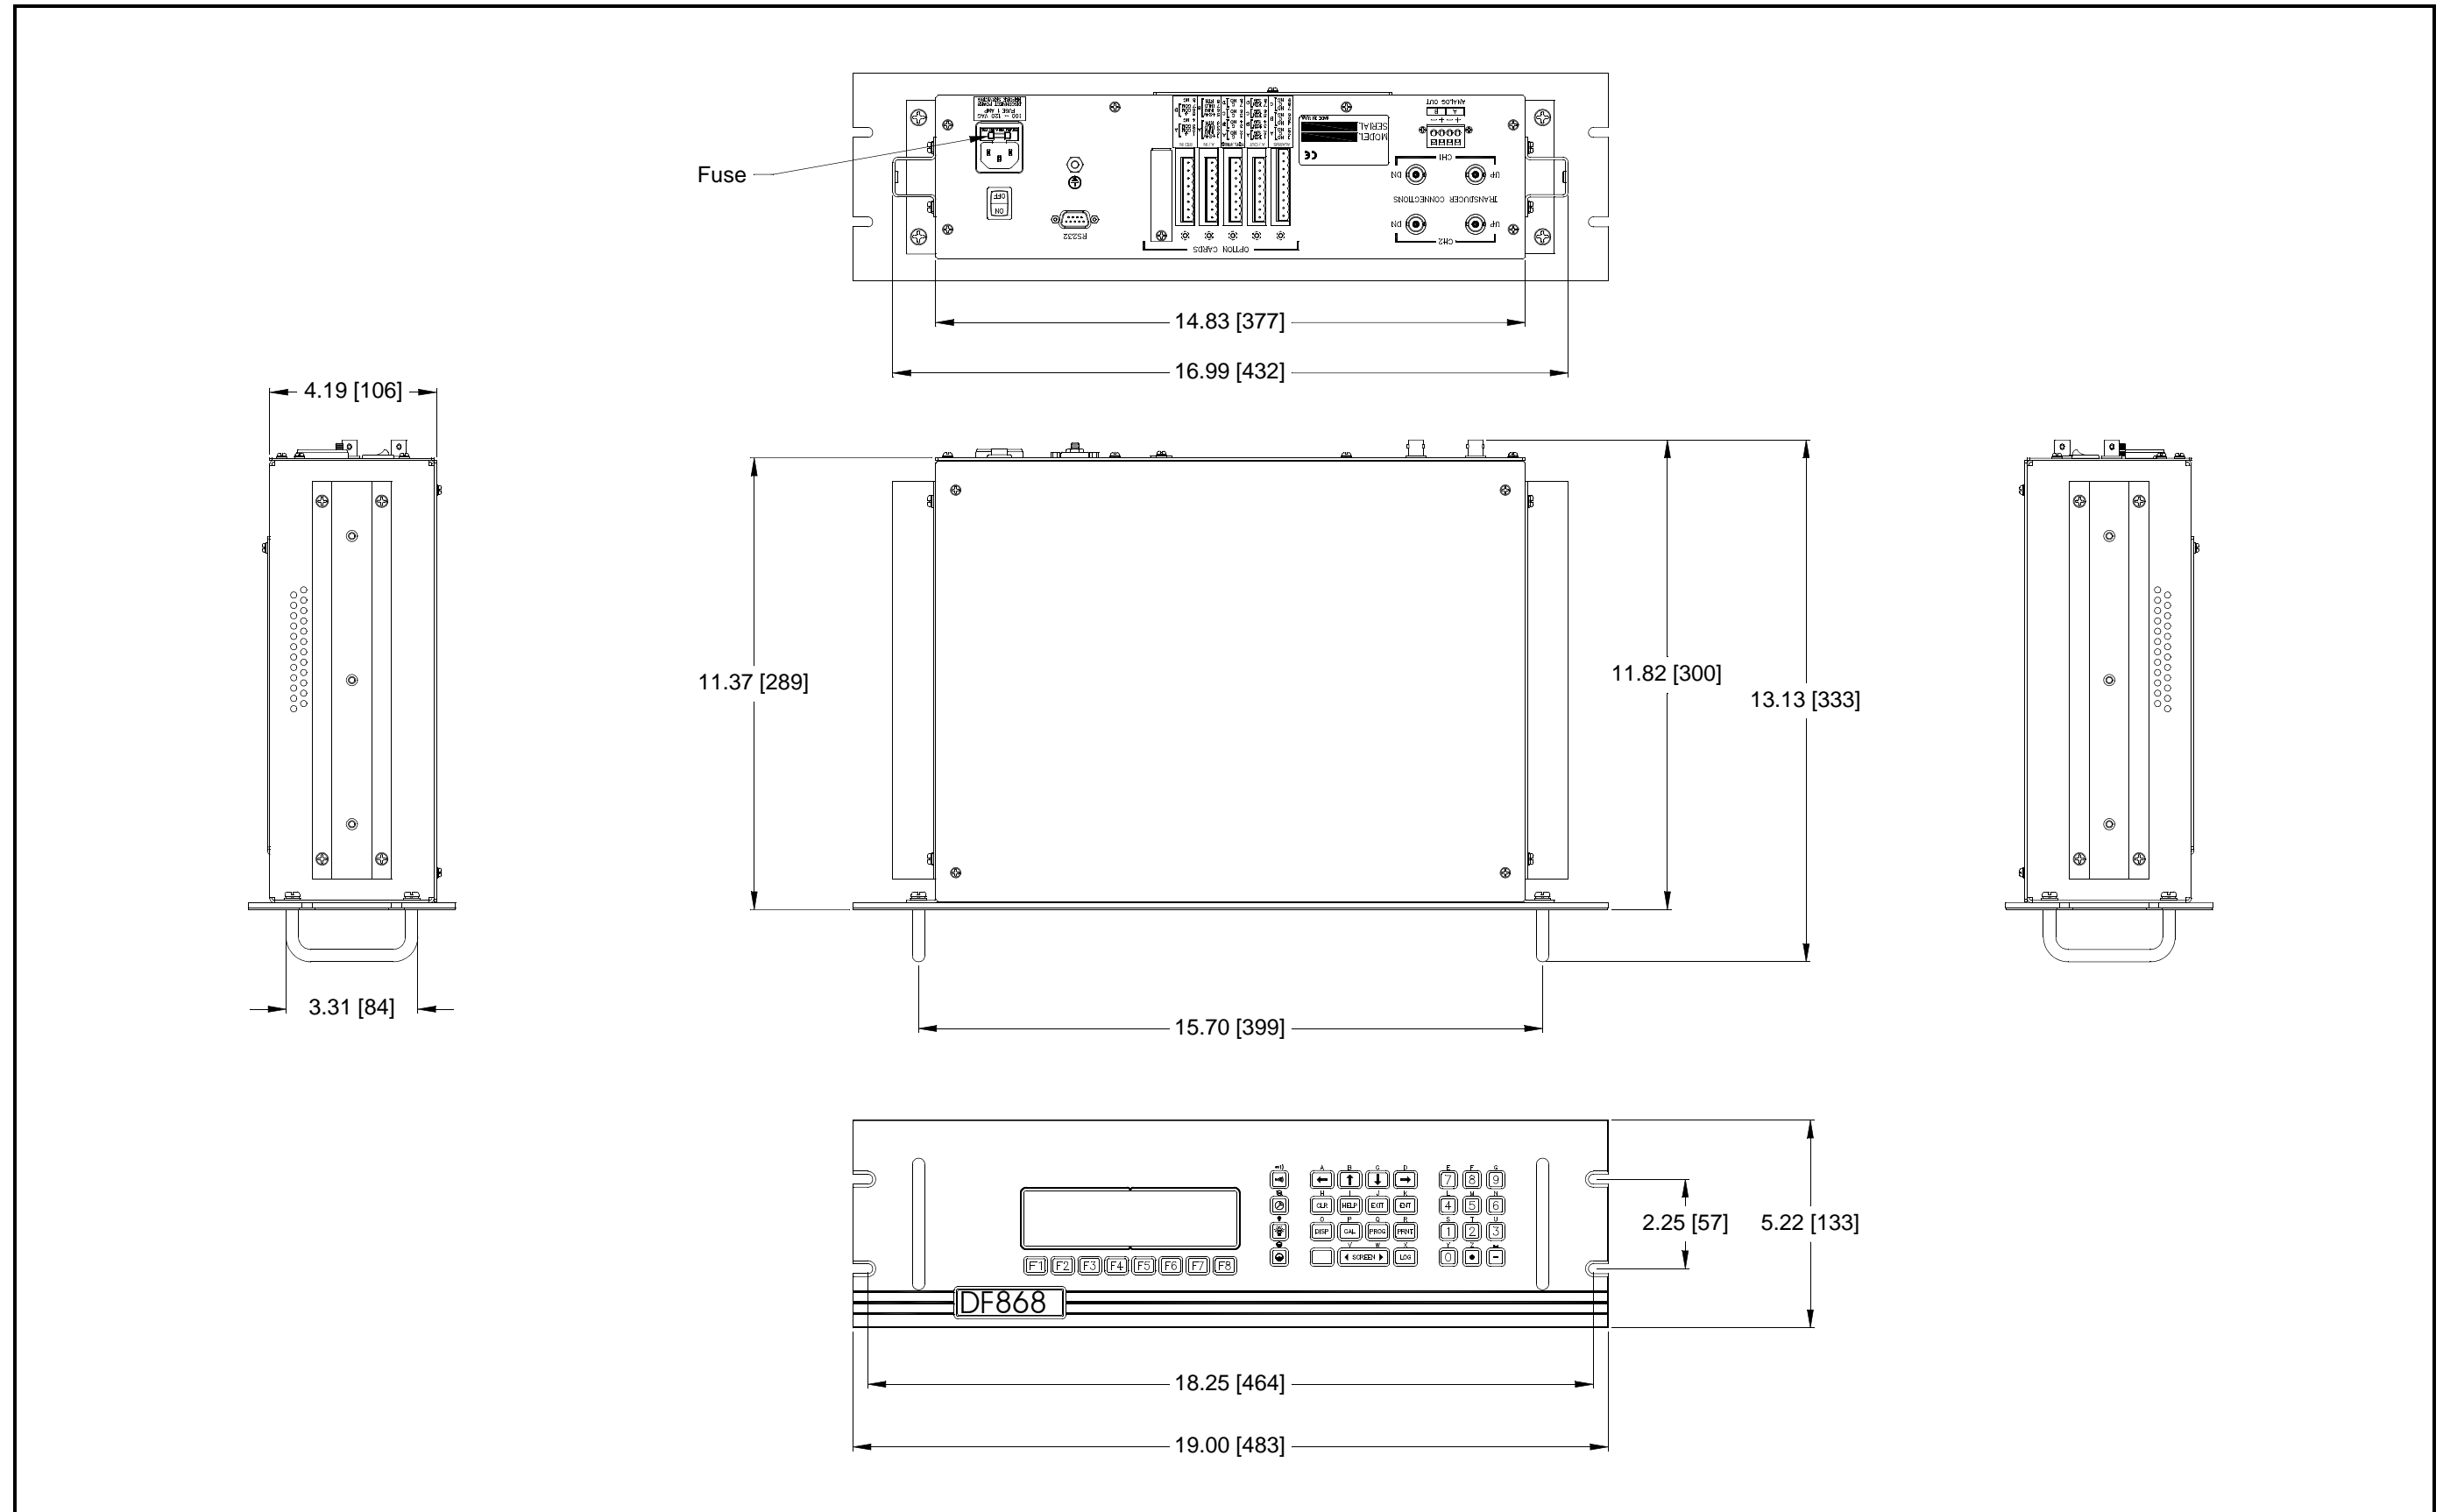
Model DF868 Rack Mount Enclosure Dimensions - Drawing #712-1076
